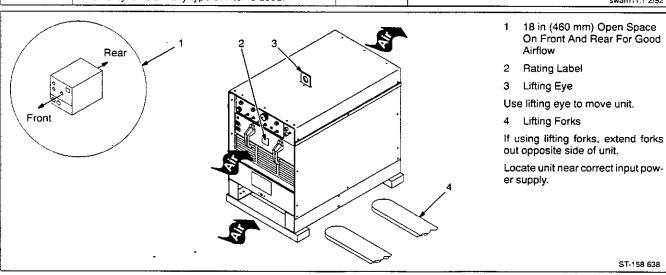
Location and Movement Of Welding Power Source
